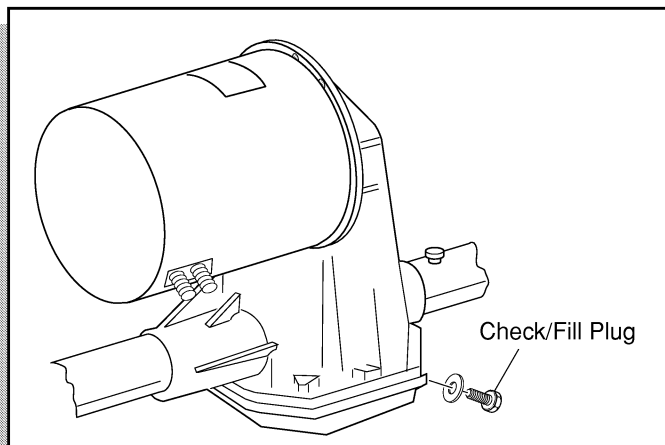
Add, Check and Drain Rear Axle Lubricant
